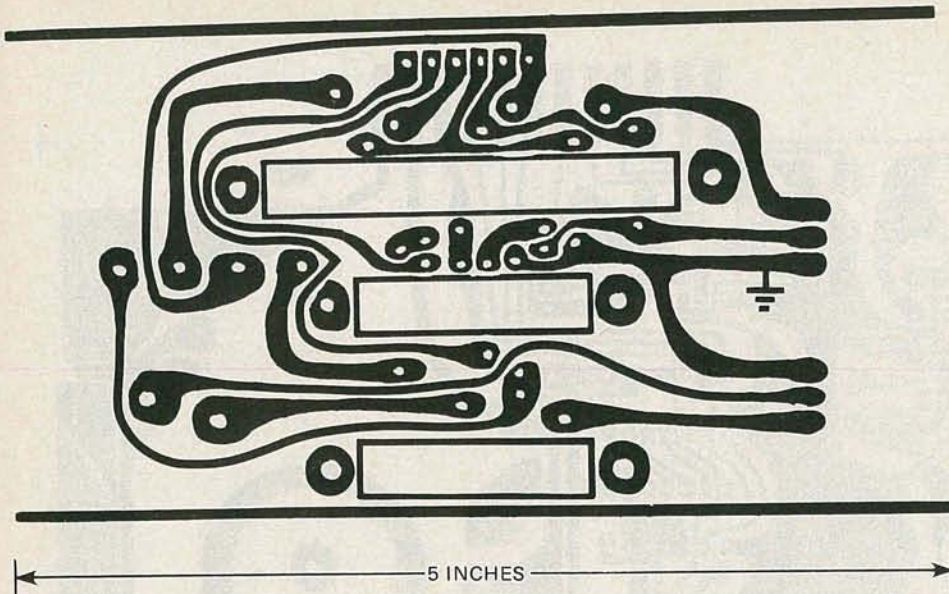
FOIL PATTERN for board 4 is shown here. The three rectangles should be cut out to accommodate the edge connectors.
